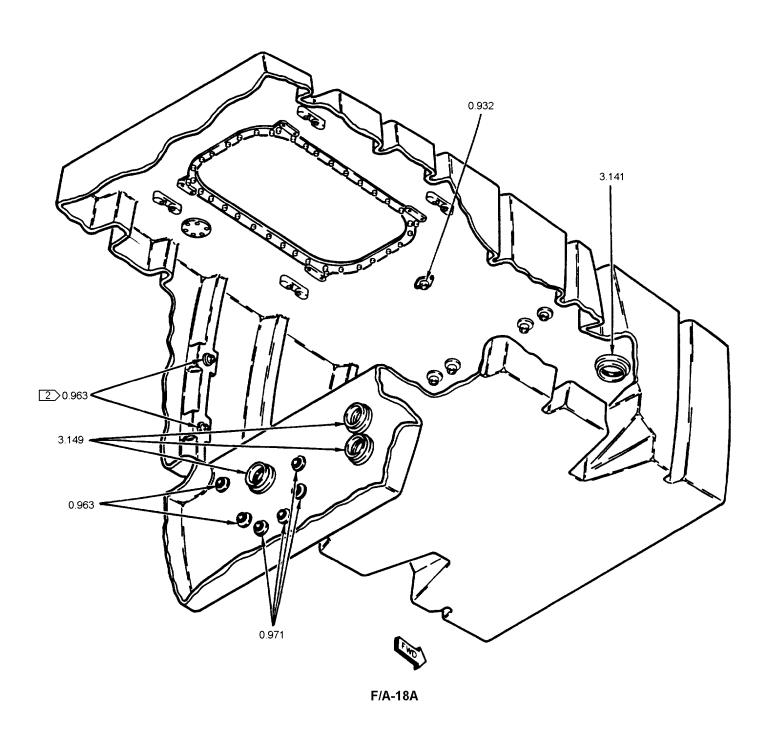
No. 1 Fuel Tank Inspection, Repair and Preparation (Sheet 2)
